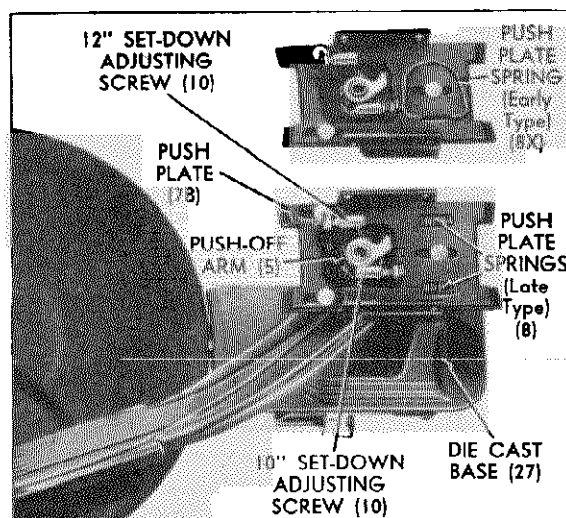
RECORD CHANGER, TOP VIEW SHOWING LOCATION OF PARTS
